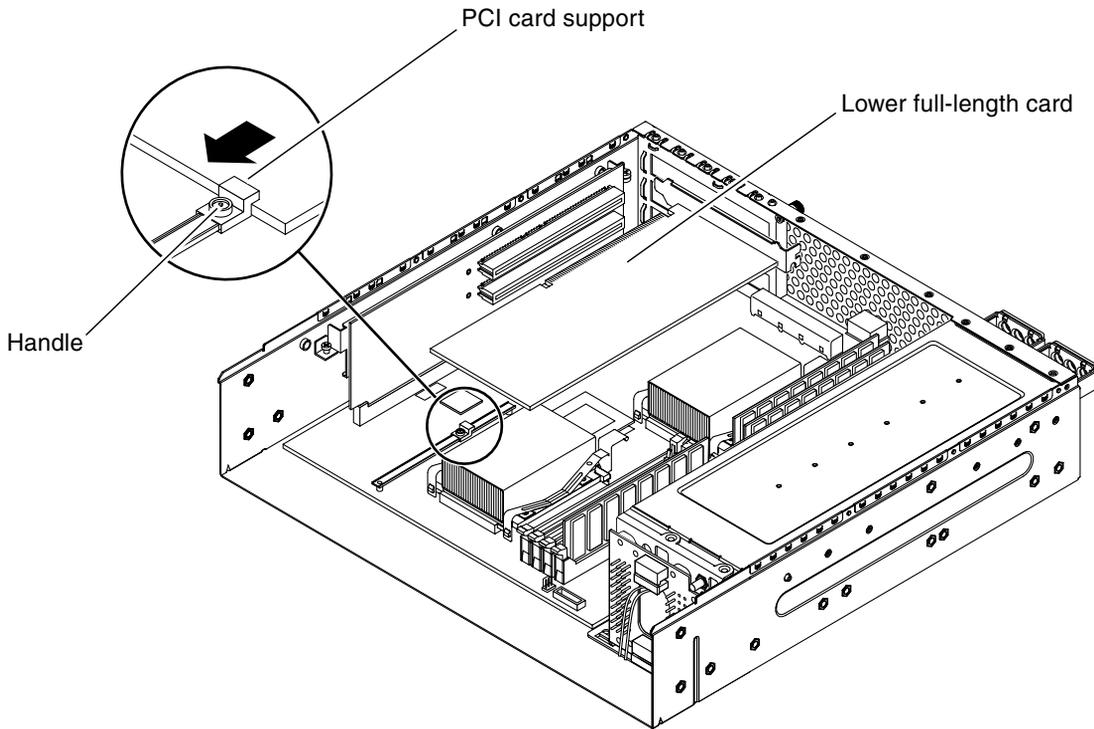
Removing and Installing the Lower Full-Length PCI Card
